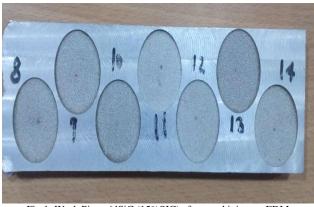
Work Piece AlSiC (15%SIC) after machining on EDM
